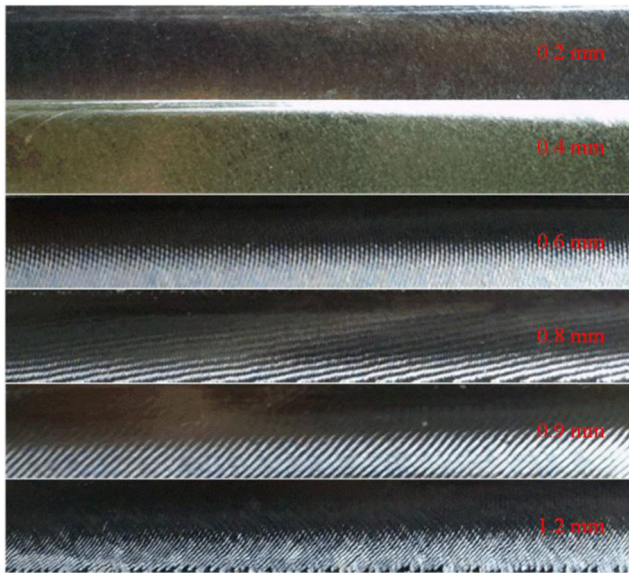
The finished workpiece surfaces under different cutting conditions in the cutting group I
